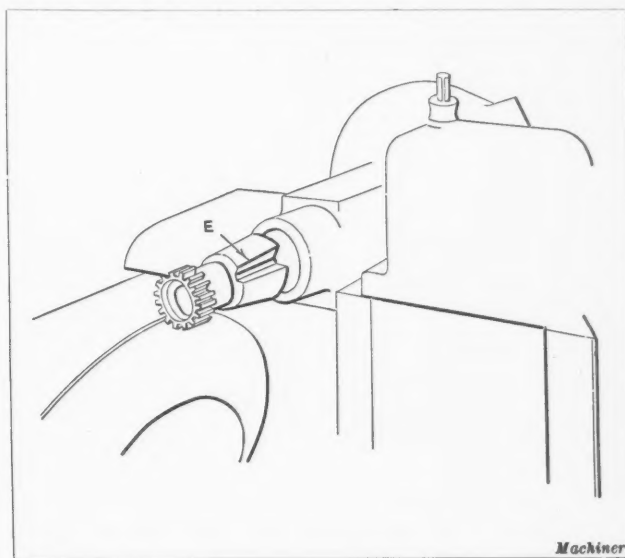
Sketch showing the Notched Collar which is employed for readily locating the Gears to be ground
